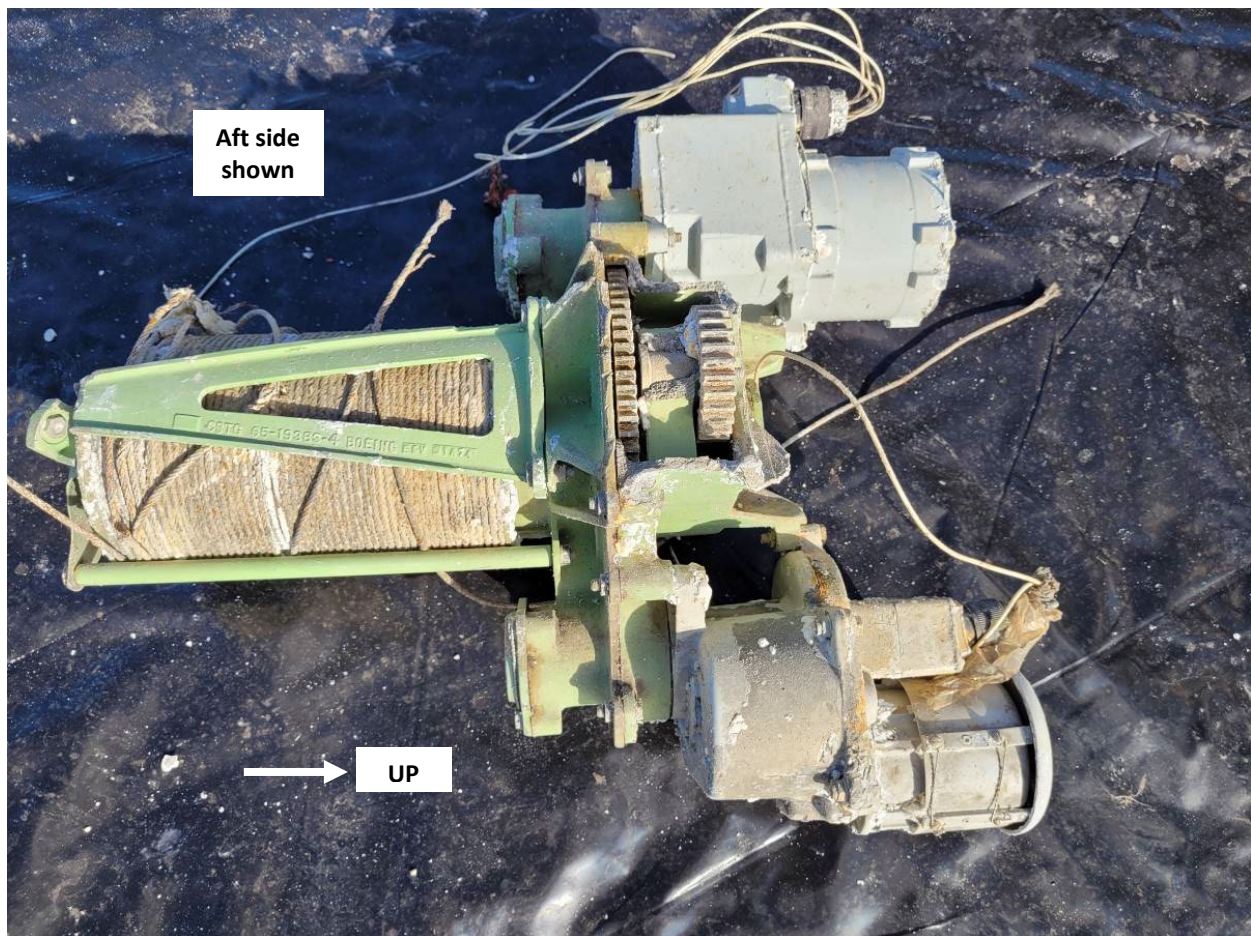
Separated Horizontal Stabilizer Trim Jackscrew gearbox, cable drum, and actuators (Boeing photo)
